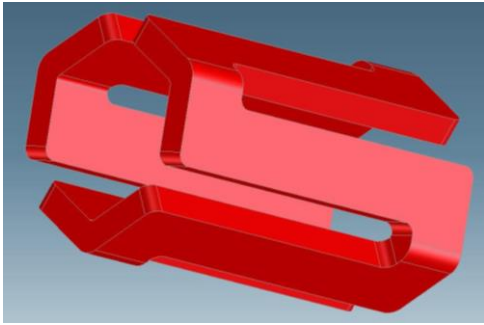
A 3D view of the closed-loop sextupole coil to be prototyped with rectangular NbTi wires.
